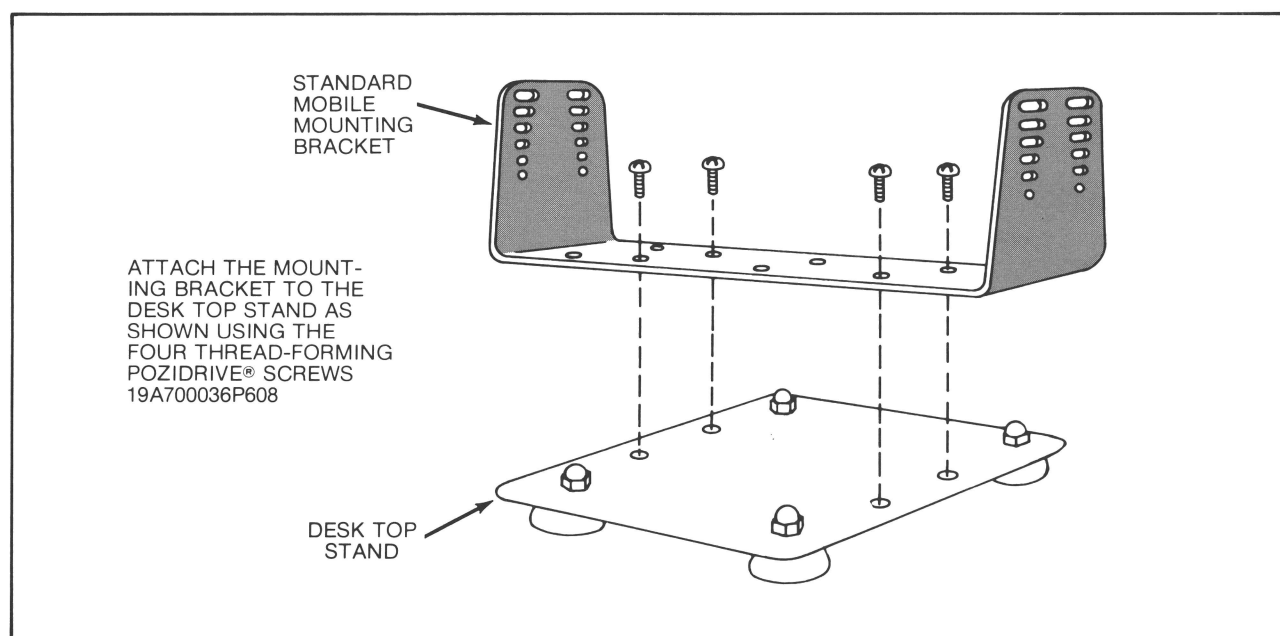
Mounting Mobile Bracket to Desk Top Stand
